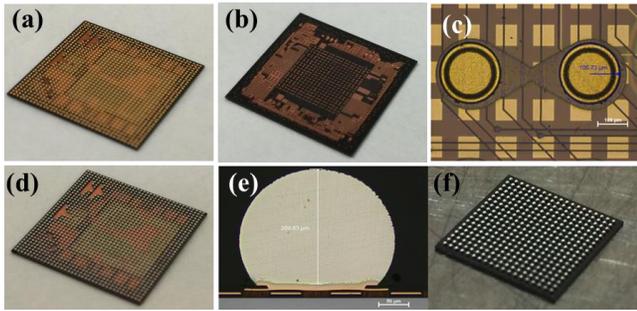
Mold-First FOWLP (a) Package with front side RDL (b) Package with backside RDL (c) UBM pad after de-bonding & adhesive cleaning (d) C4 bumped package (e) X-section of C4 bump on FOWLP (f) WLCSP with C4 bumping.
